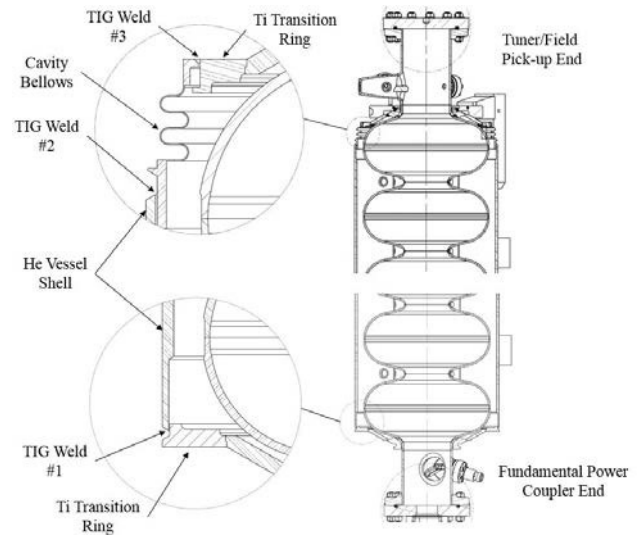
Section view of dressed cavity showing the weld joint geometry.
